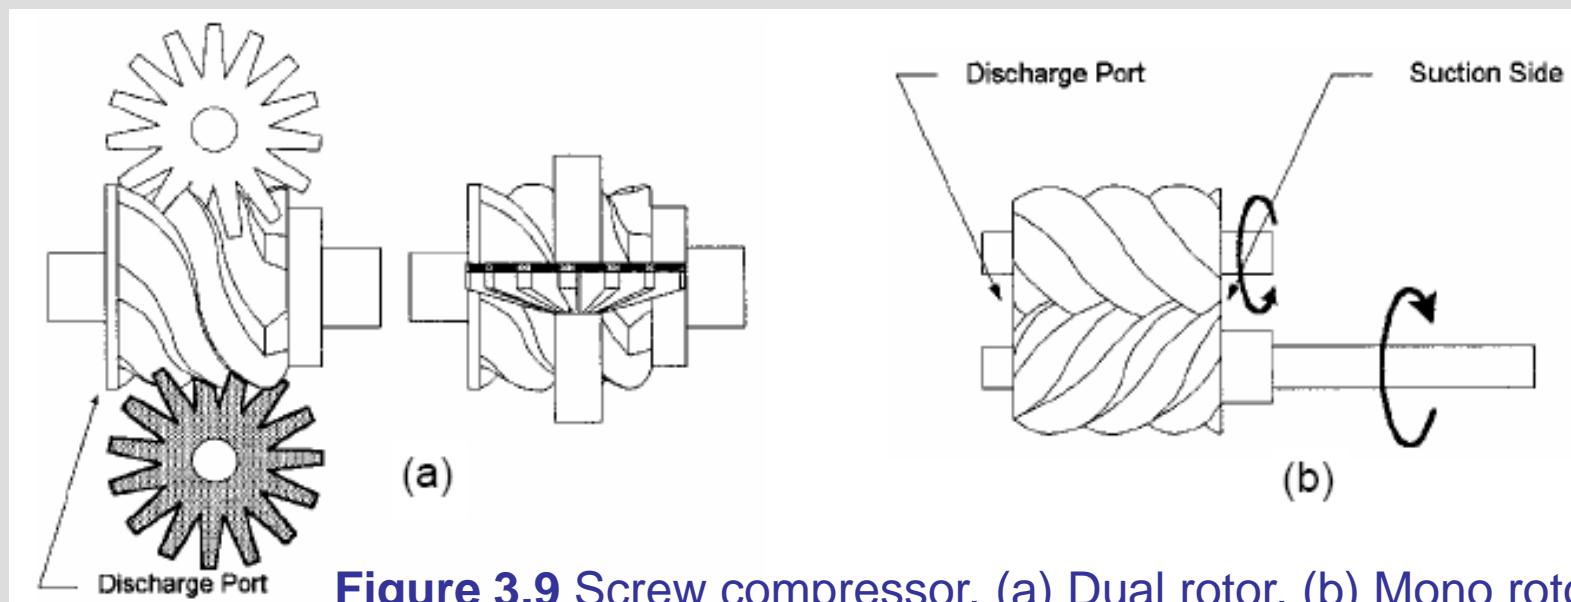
Screw compressor. (a) Dual rotor. (b) Mono rotor
